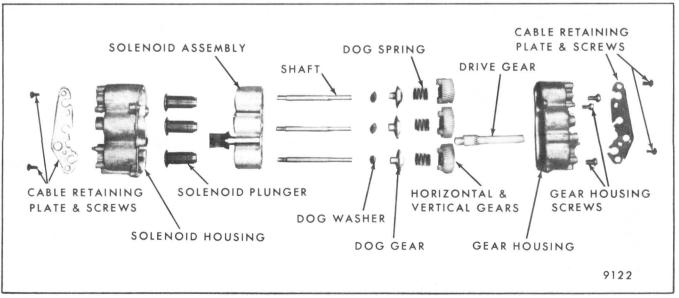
Six-Way Seat Adjuster Transmission Component Parts - Full Width Bench Seat
